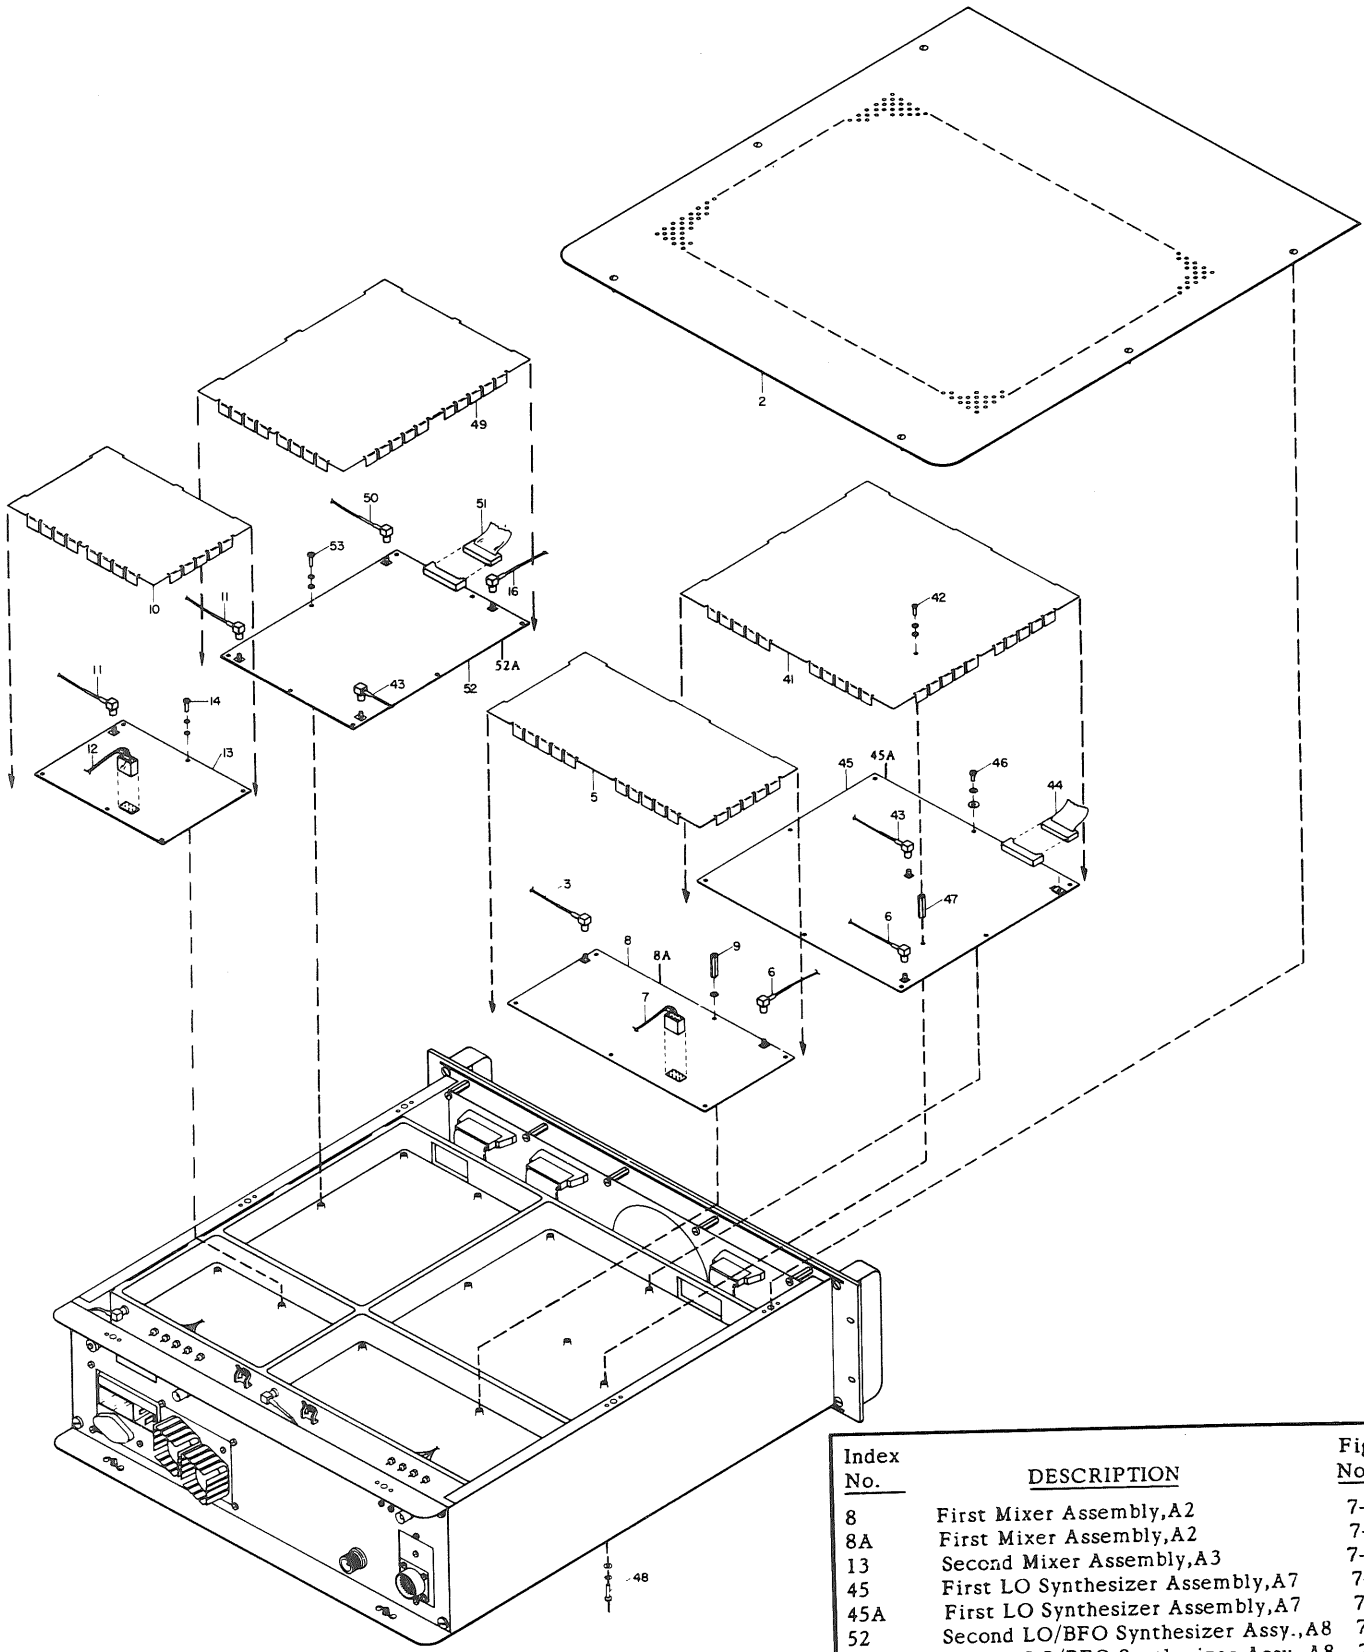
RECEIVER ASSEMBLY. RADIO R-2174(P)/USS
